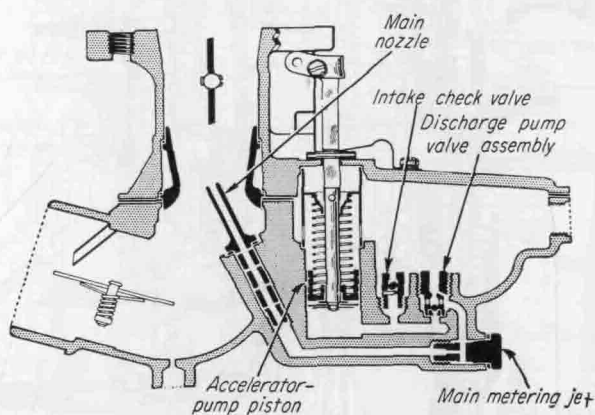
Accelerator-pump circuit in updraft carburetor. (Carter)
